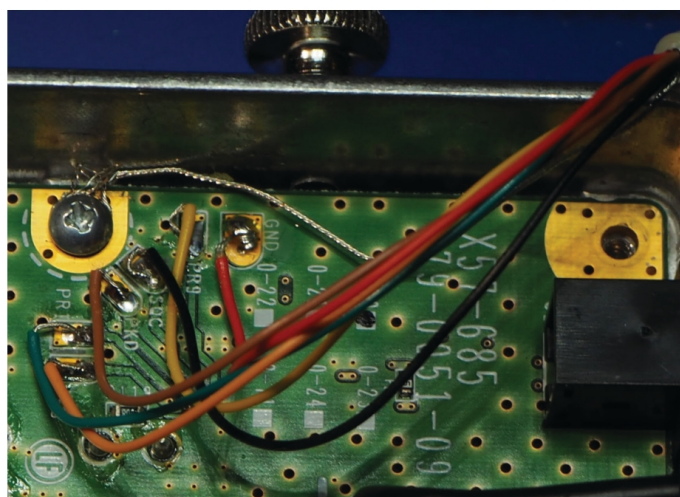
Radio with the top off showing pads and wiring in place for the 6-pin-mini-DIN pigtail.
